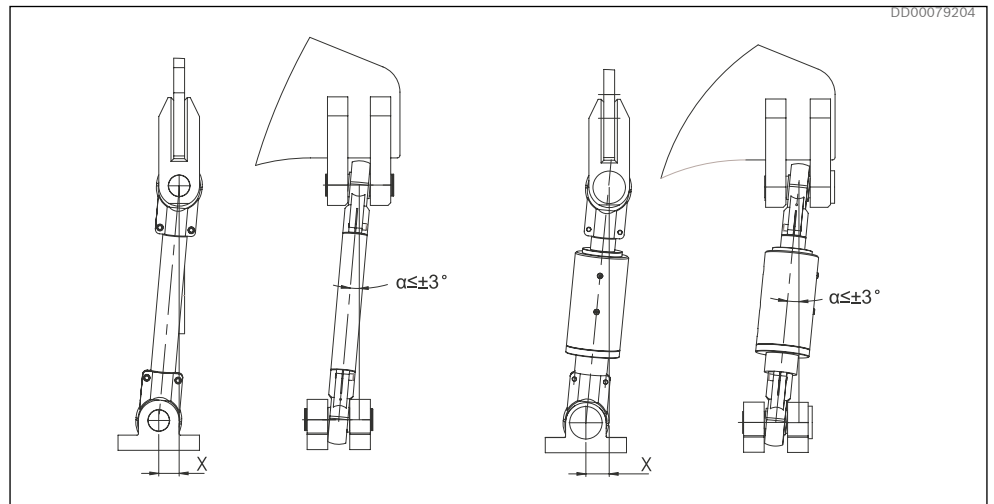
Installation of articulated connection and hydraulic cylinder for DTCA
